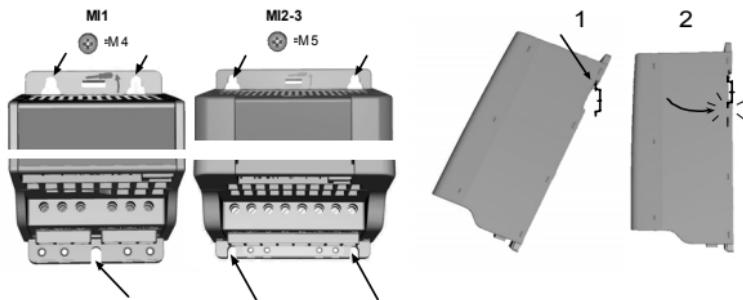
Screw mounting (left) and DIN-rail mounting (right)
